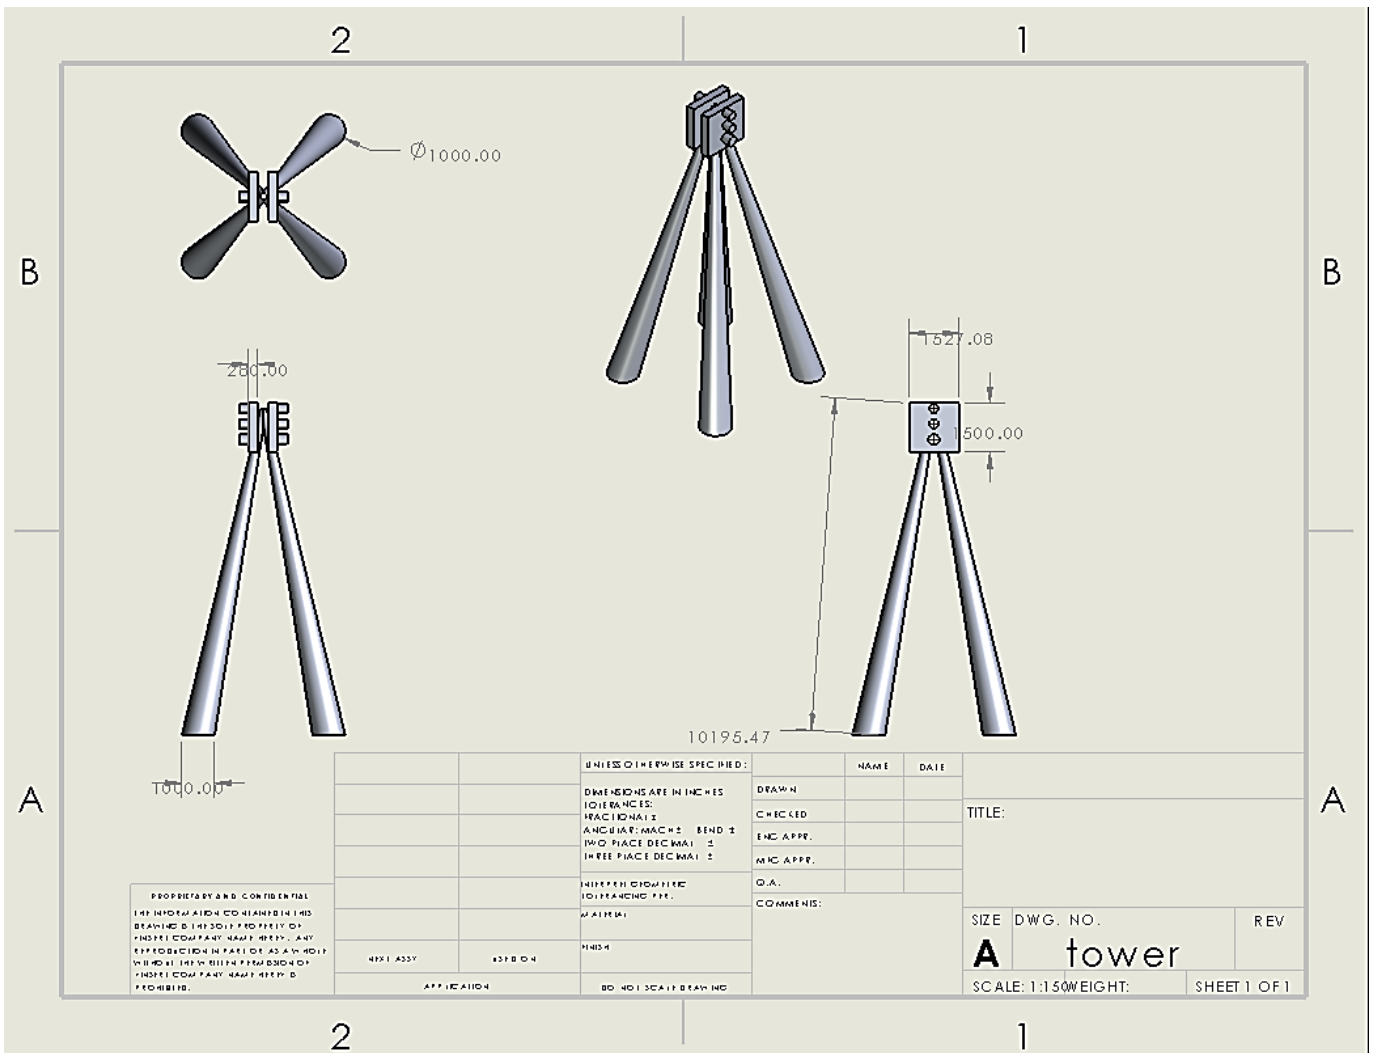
Electrical power grid drawing (SolidWorks CAD)
